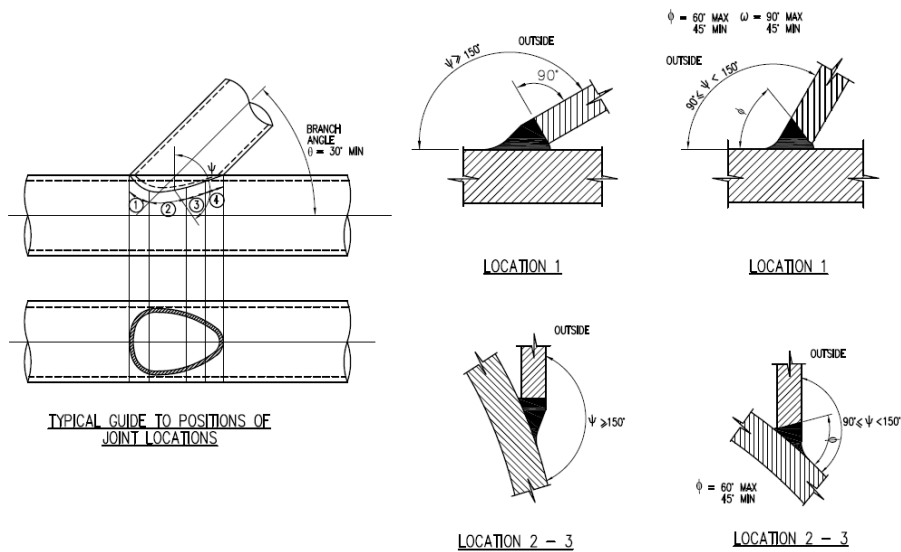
Weld profile specifications as issued to the fabricator for these tests in line with appropriate standards, Section 3.3.
